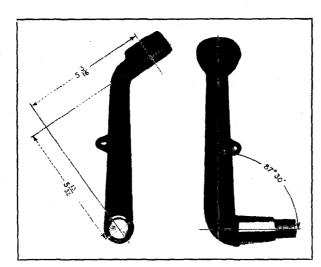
V-63 Parallel Rod Arm (R. H. Shown)
